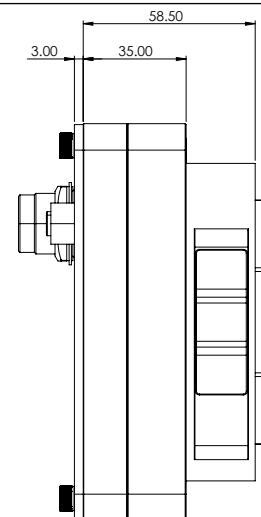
BioProTT™ FlowSU System - Technical Drawing: Side
